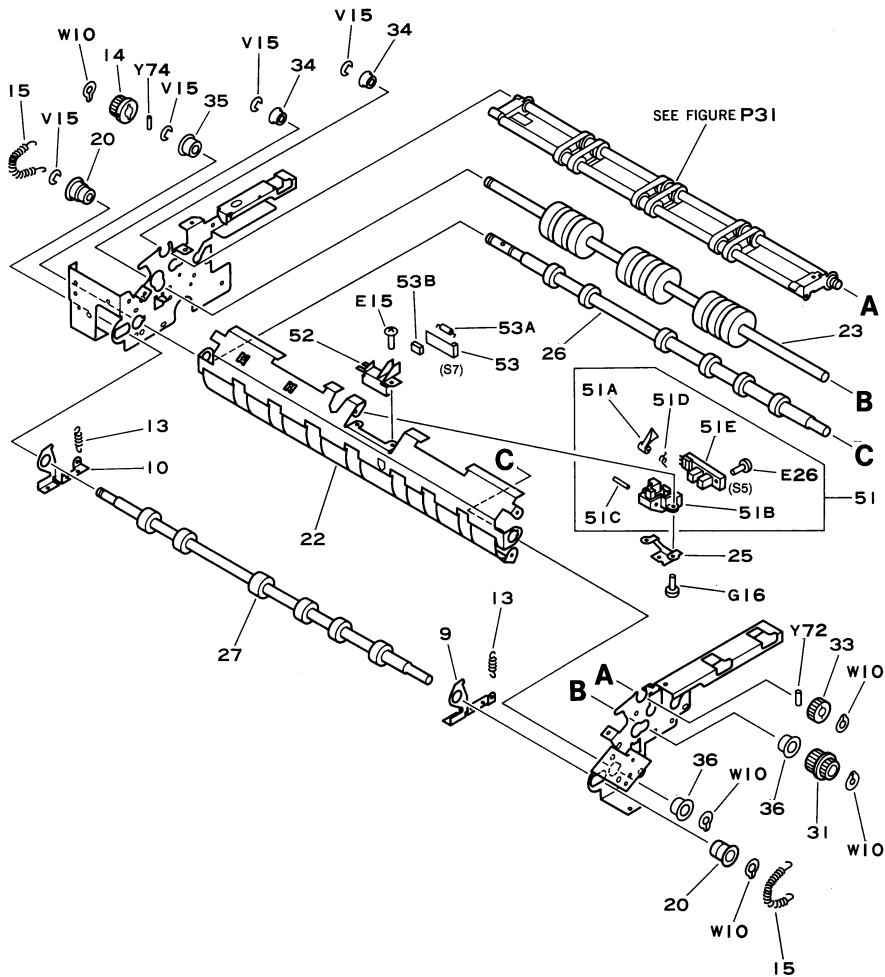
PICK-UP ROLLER ASSEMBLY (2/3)
